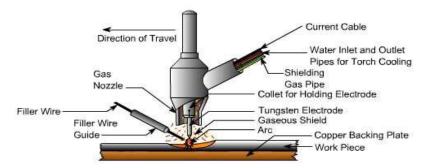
The gas tungsten arc welding process (Pasupathy 2013)
